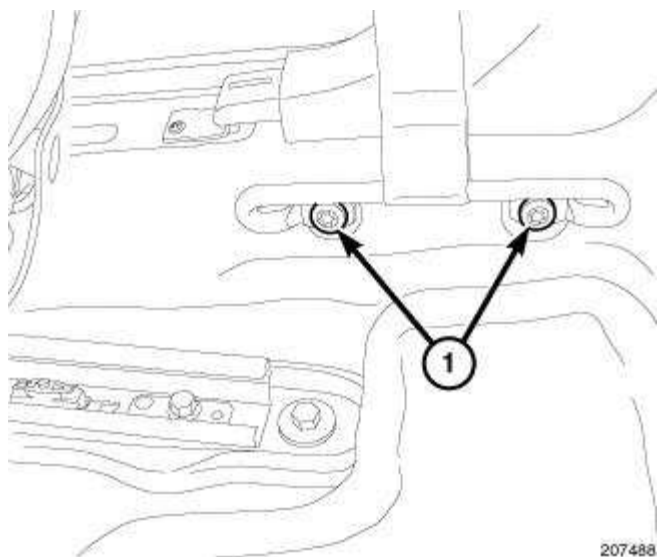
Identifying Lower Seat Belt Anchor Bolts
